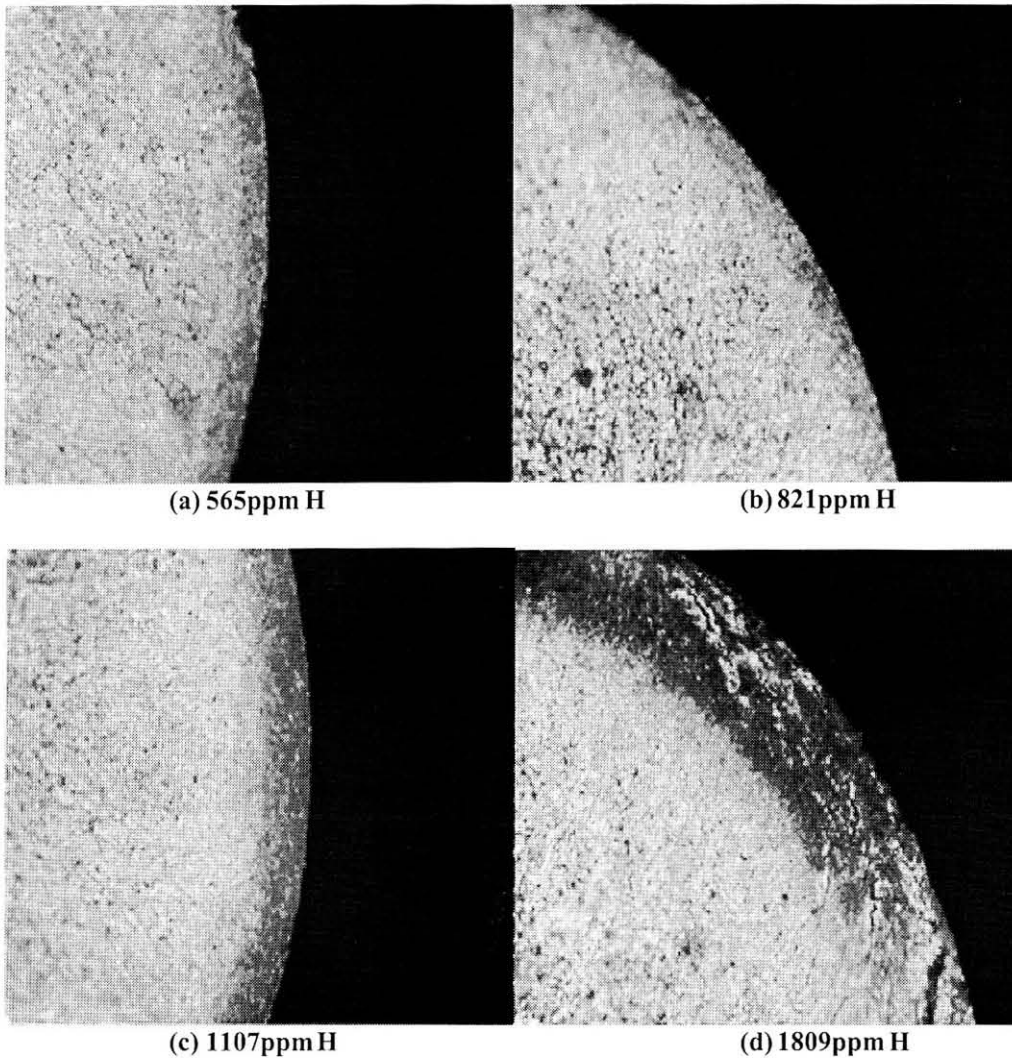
DF-LOM images of fracture surface from bend tests
